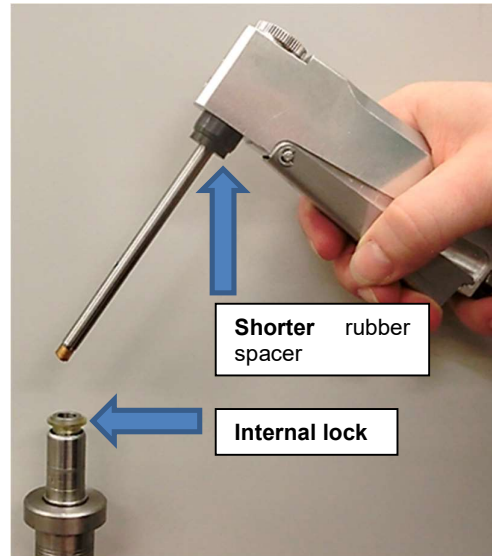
Short rubber spacer for Spindles with internal lock
